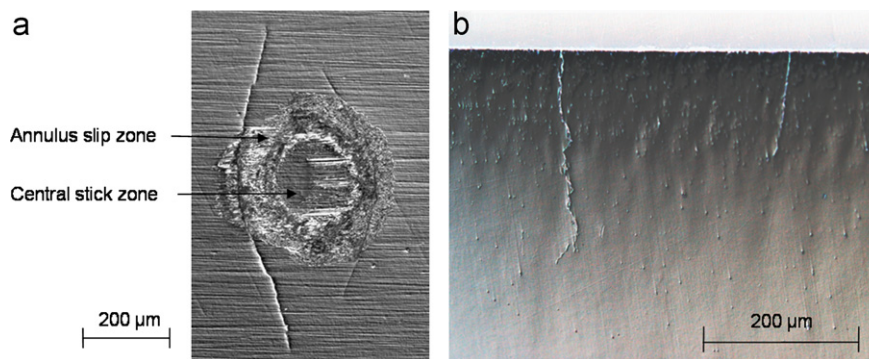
(a) Cracked surface of the plane sample after 70,000 fretting cycles; and (b) one cross-section of the cracked volume.
